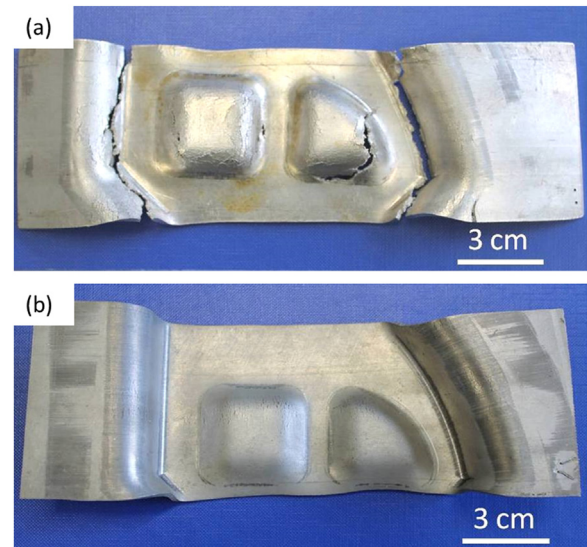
Pictures of AZ31 alloy strip after hot stamping at 450 °C [128]. (a) Conventional TRC strip; and (b) MC-TRC strip. After stamping, the TRC strips show severe cracking while the MC-TRC strips are crack free.
